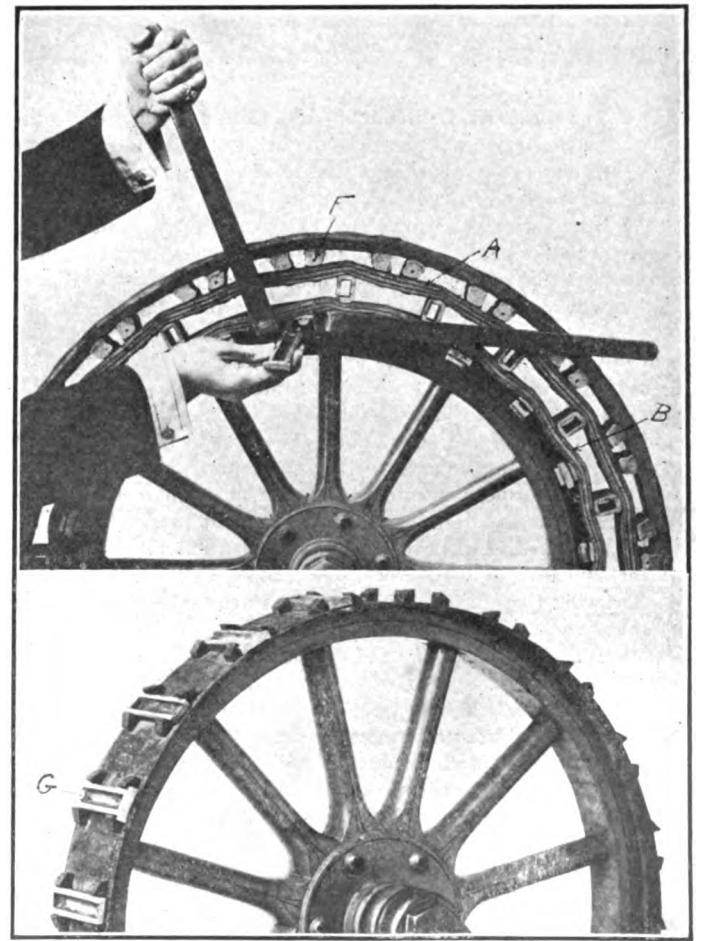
(Upper) With side flanges removed, showing tire Irons
